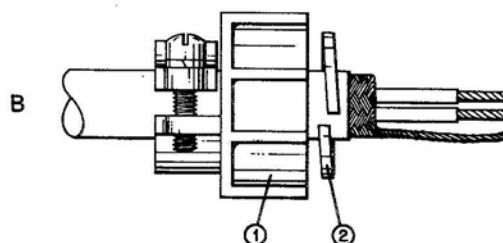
Fabrication of Coaxial Cable to Antenna Plug P-101
